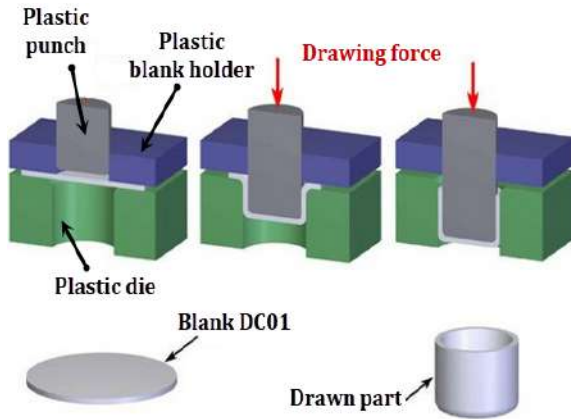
Schematic view of deep drawing process with plastic tool elements [2]
